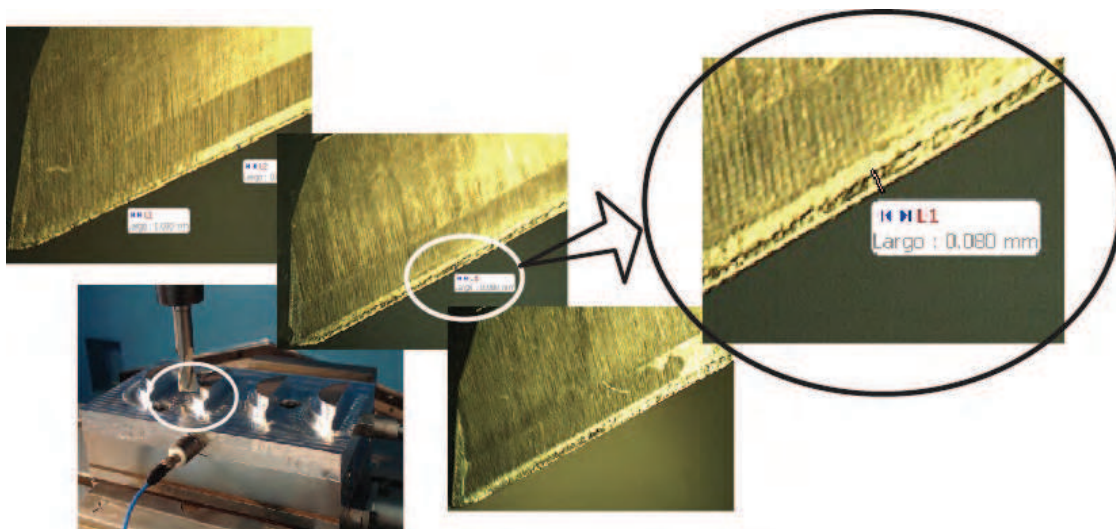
Evolution of flank wear on the cutting edge. The images were taken through a stereoscopic microscope. The cutting tool diameter is 12 mm.
